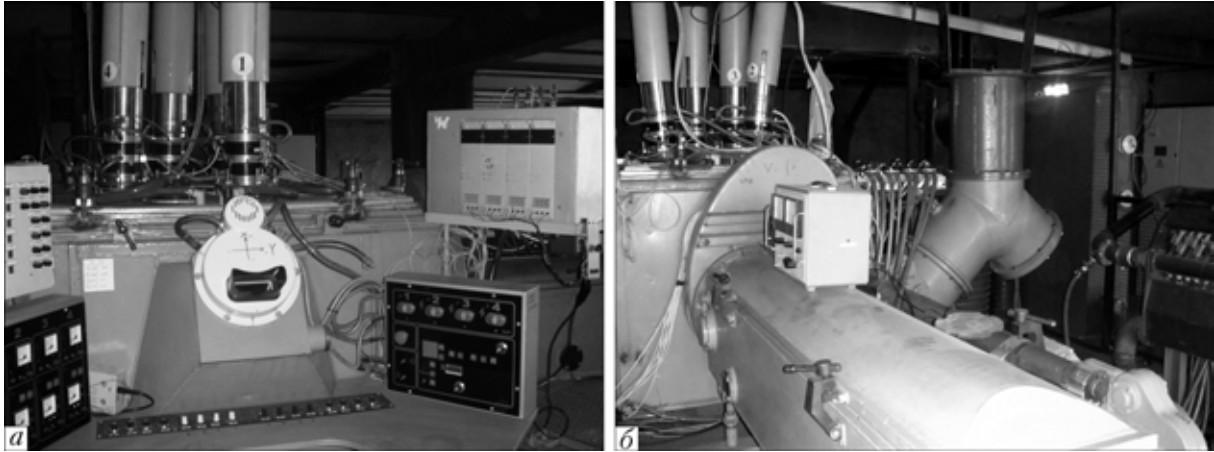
MV-1 electron beam equipment: a) the operator panel; b) the view from the side of the loading chamber.
